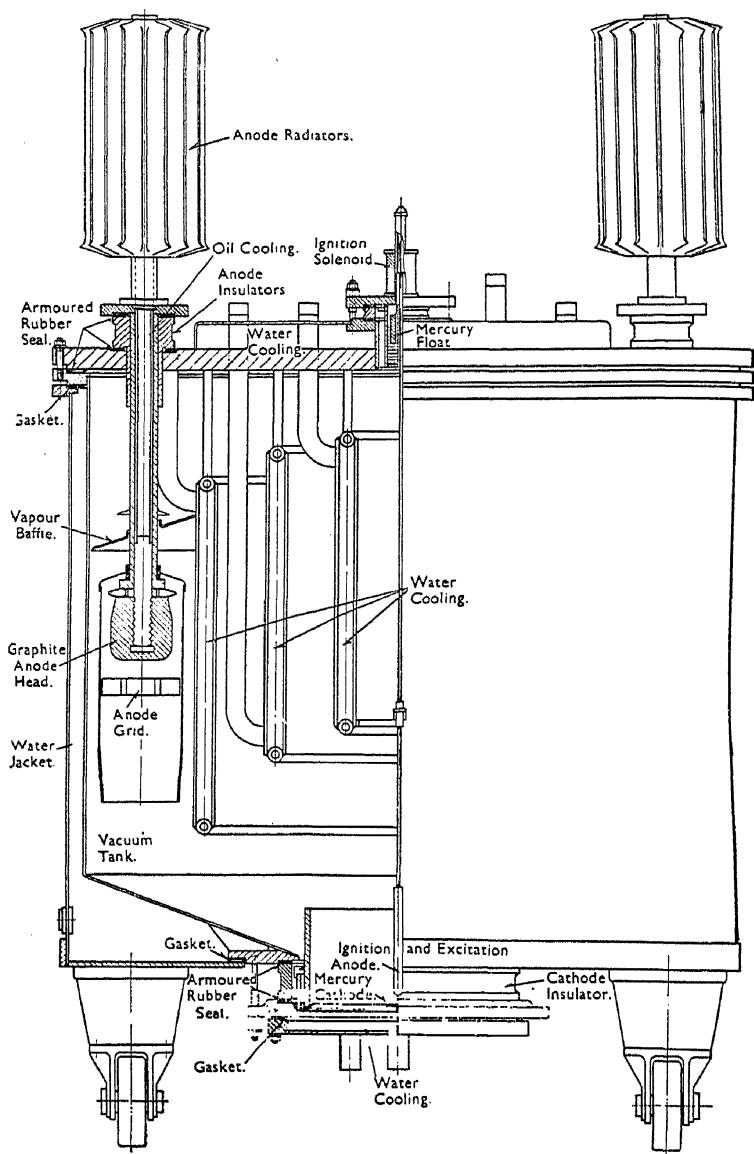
SECTIONAL ARRANGEMENT OF ENGLISH ELECTRIC
